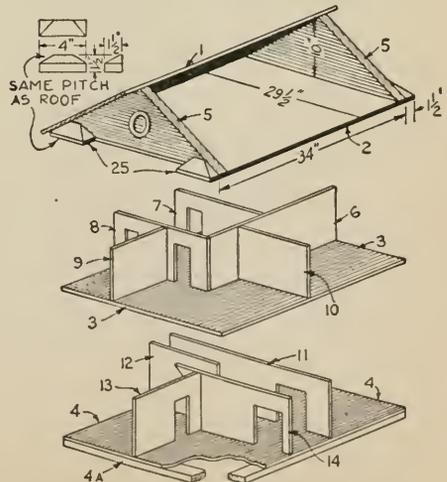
The house is made in three parts. The small fittings are added before putting the sections together.
